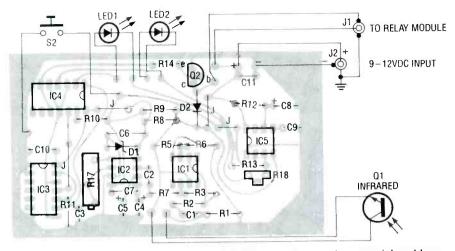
STUFFING THE IR-RECEIVER PC BOARD should present no special problems.
